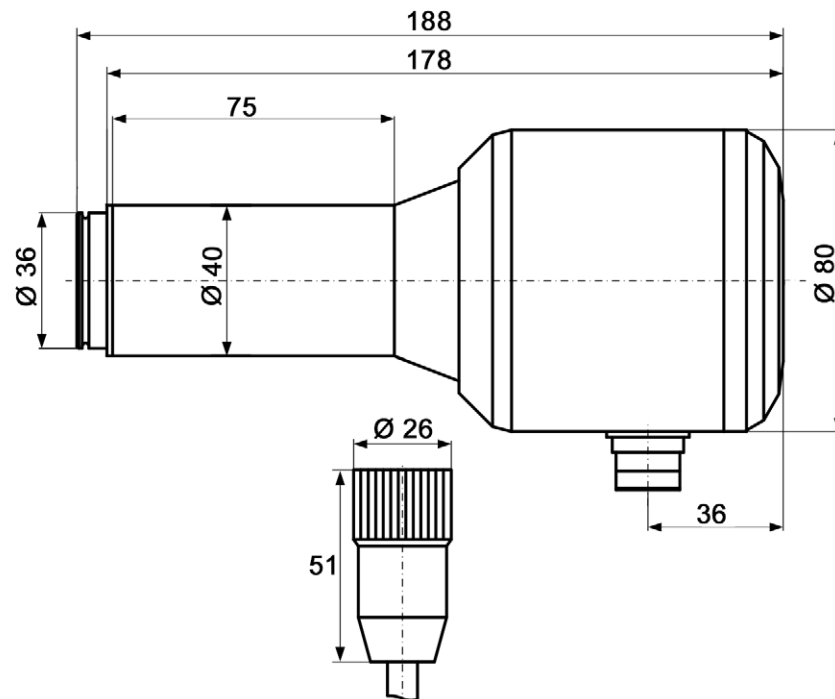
Dimensional drawing compact flame scanner F200K, F200K Ex-II
